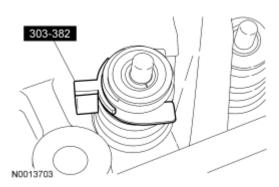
Camshaft Roller Followers Courtesy of FORD MOTOR CO.
